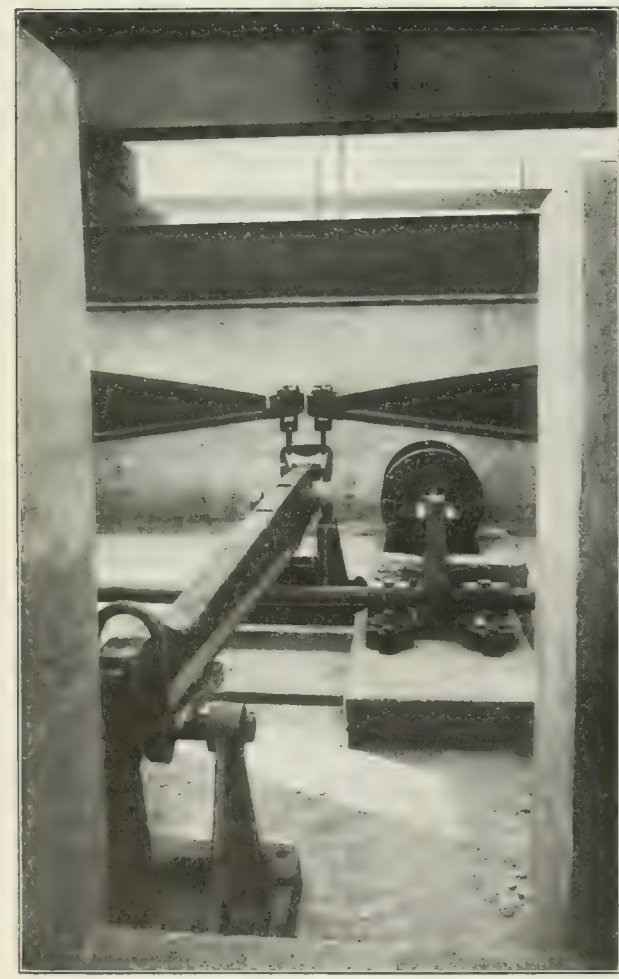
Method of Connecting the Scale Beams in the Pit
